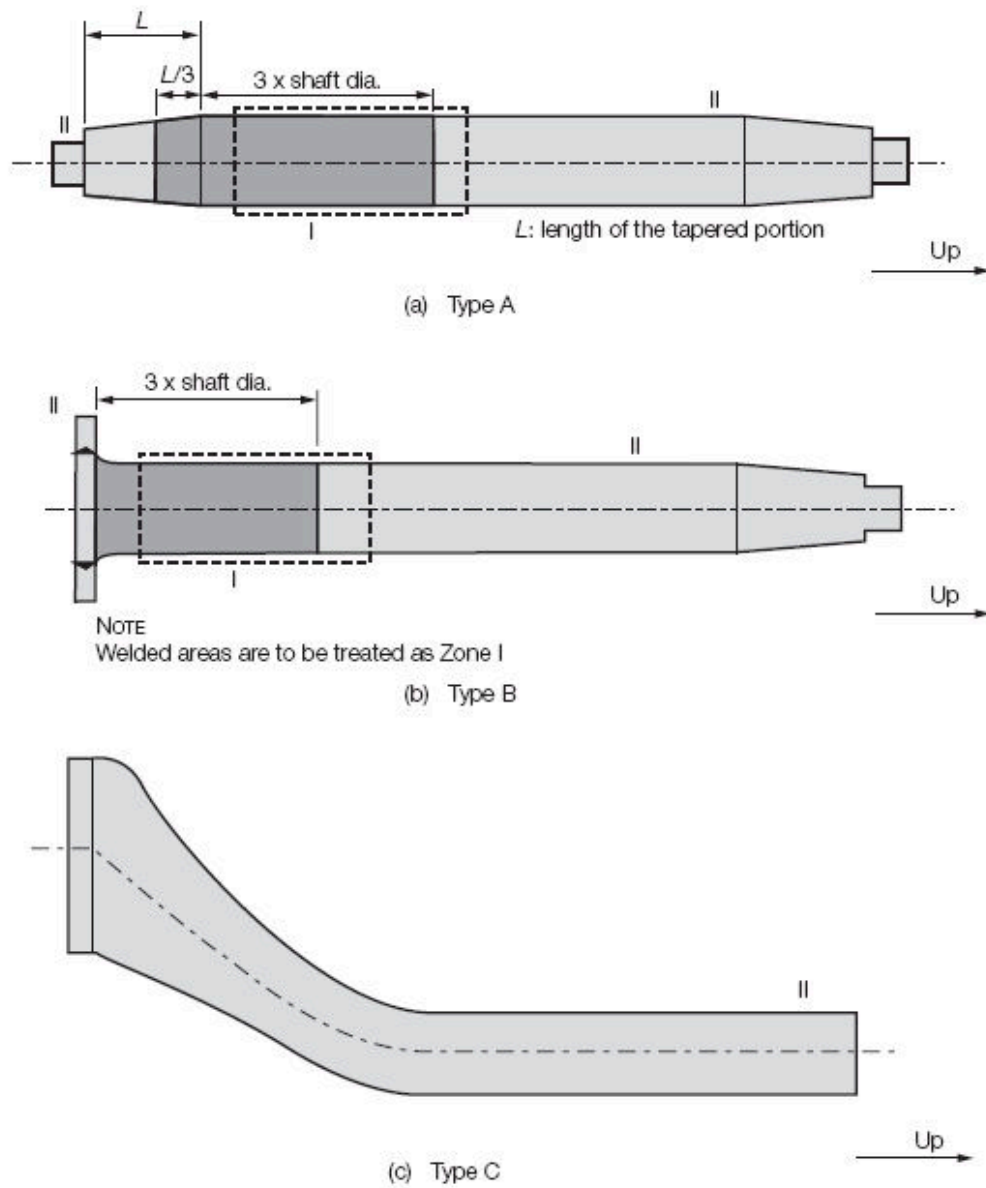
Inspection zones for magnetic particle/dye penetrant testing on rudder stocks
